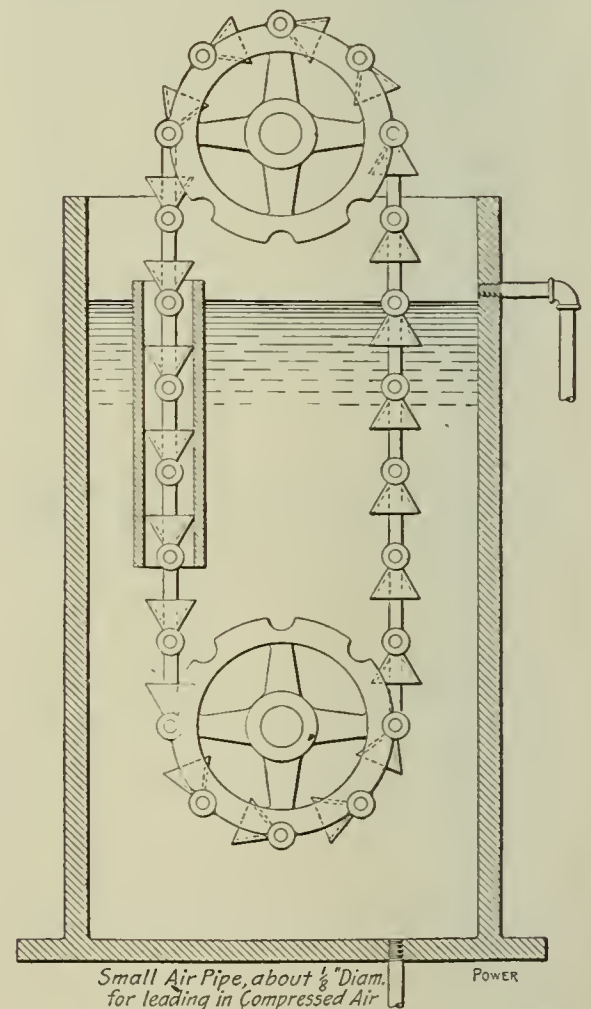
SECTION OF MACHINE, SHOWING AIR SUPPLY
